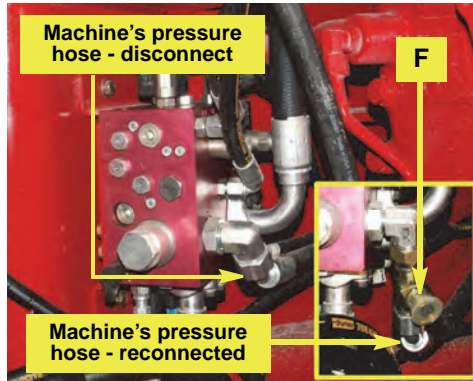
with inset: Pressure run-tee installed, machine's pressure hose reconnected
